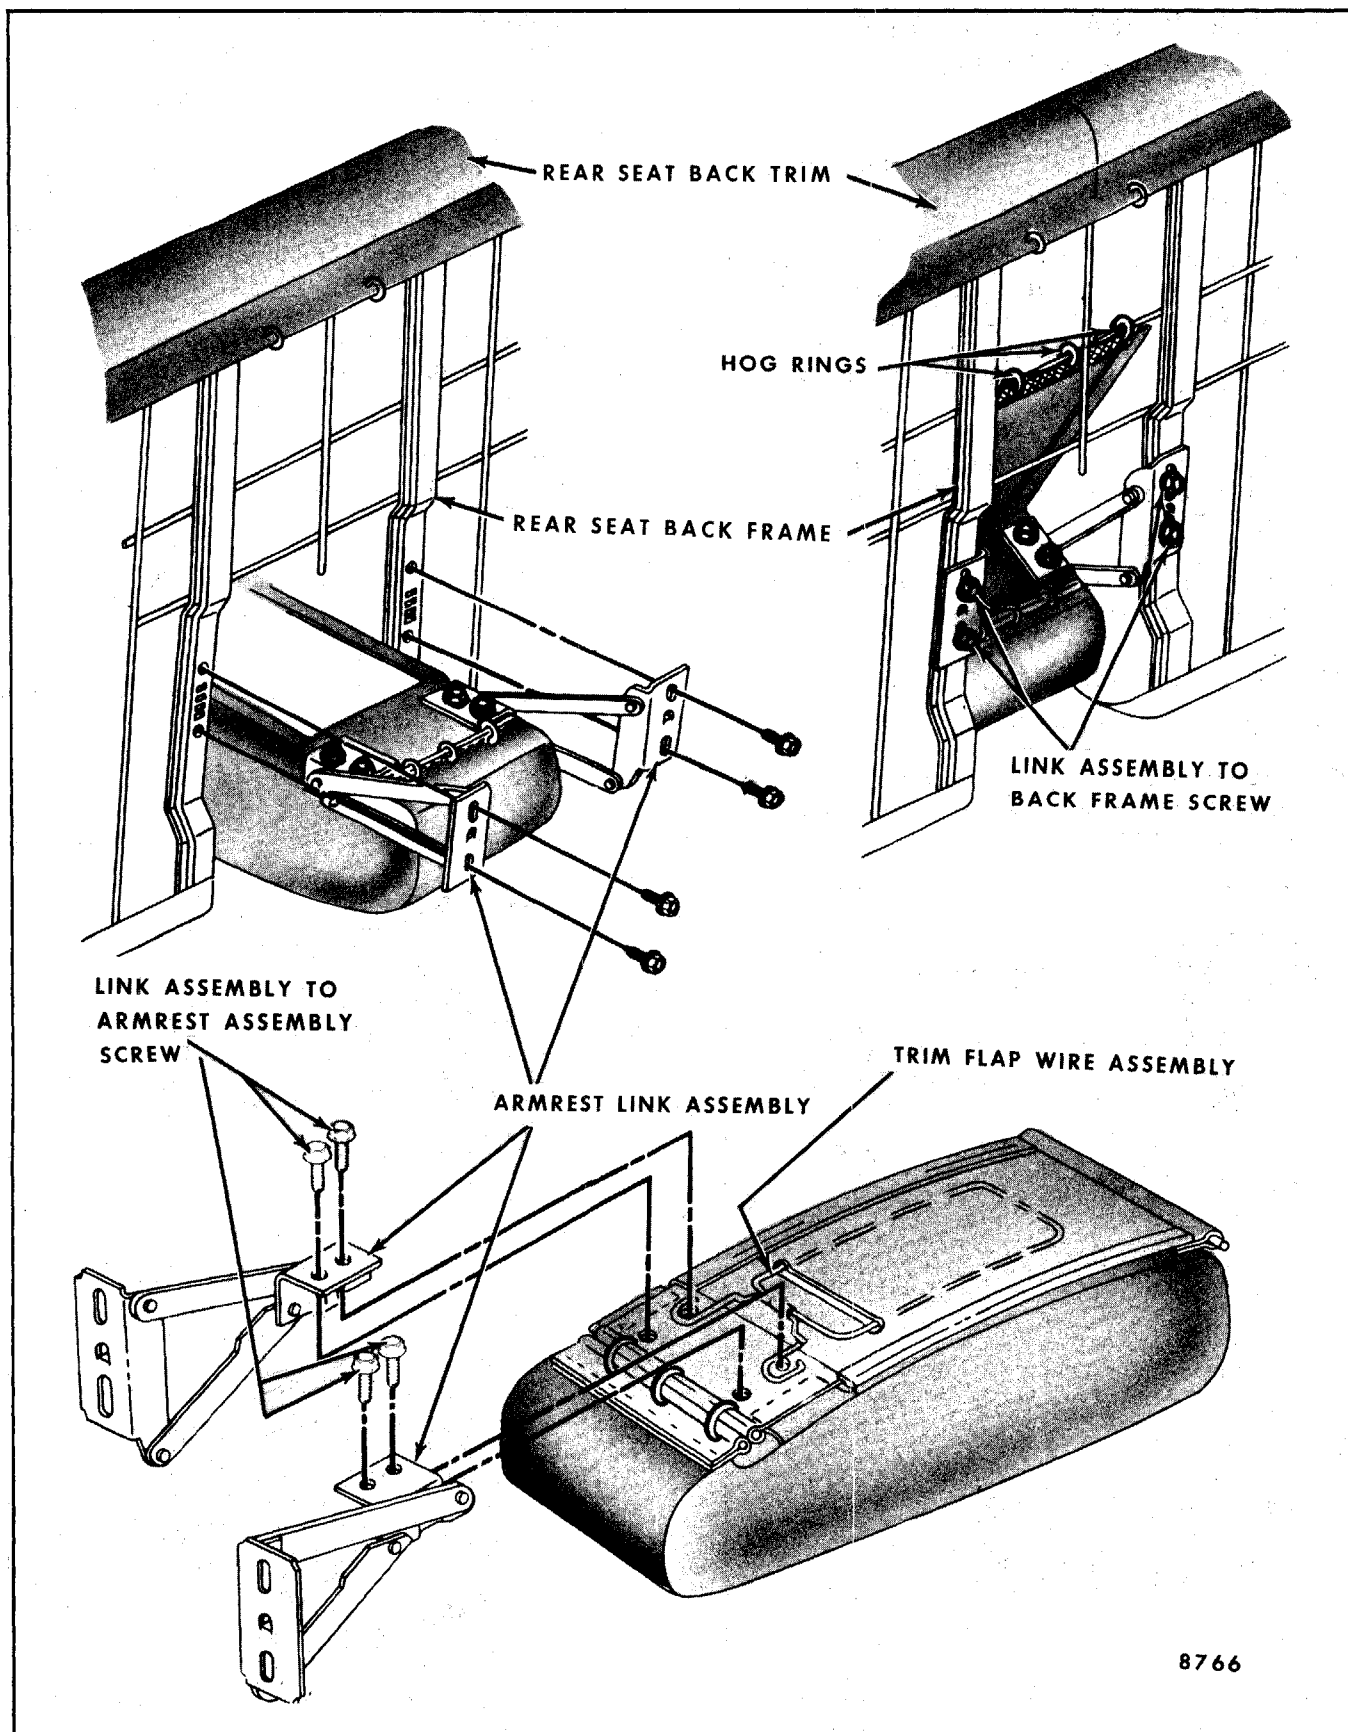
Rear Seat Back Center Armrest Installation - "K" Style
